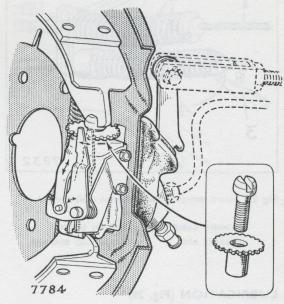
A left hand self adjusting wheel cylinder with arrows on the pawl linkage indicating the direction of travel as the brake is applied and released. The insert shows the screwed tappet and adjuster wheel.
